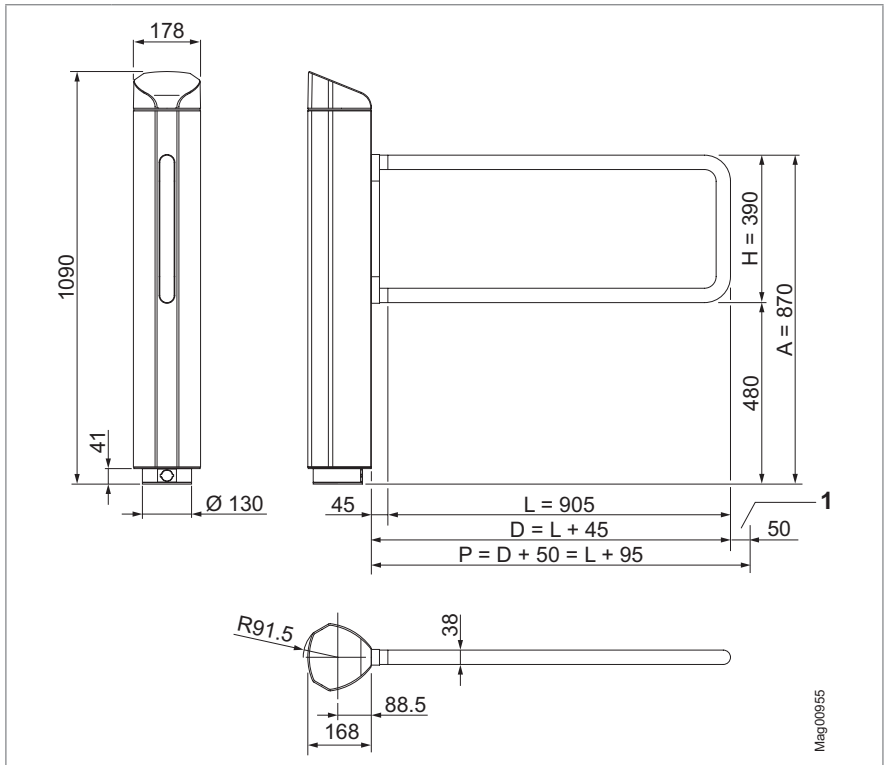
Dimensions mSwing with bracket FMSW\_MU (dimensions in mm)
